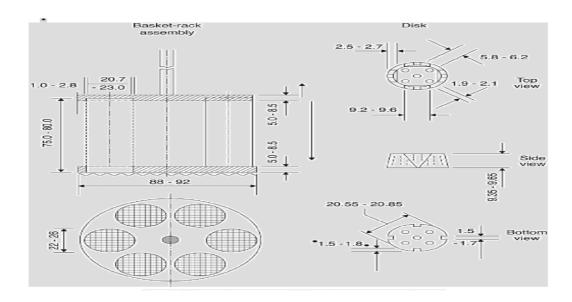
Disintegration apparatus. (All dimensions are expressed in mm.)
